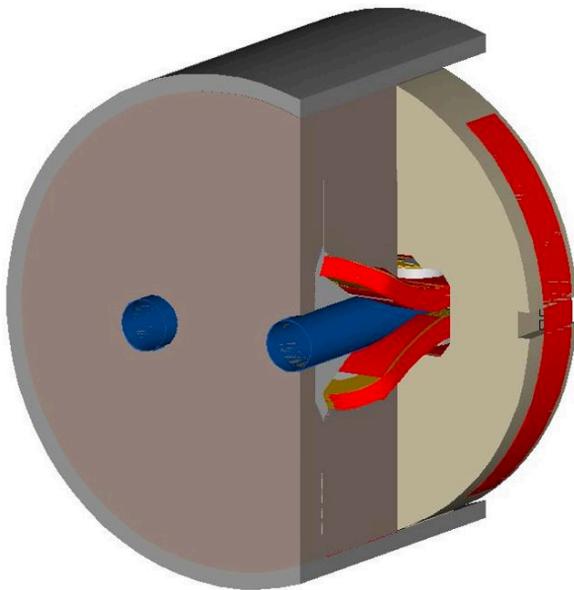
Isometric view of DS magnet end with cutaway, showing flared windings supported on 3-piece shoe assembly, bladder arrangement for isostatic preload of body and ends of all windings.
